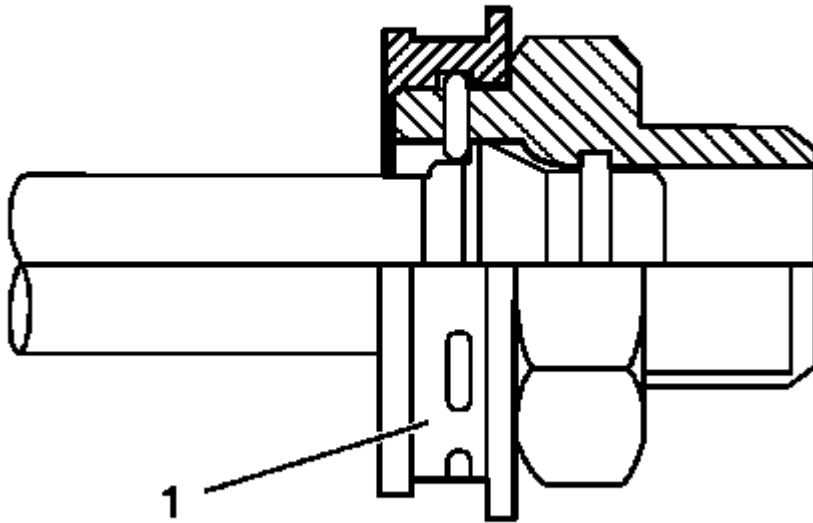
Automatic Transmission Oil Cooler Fitting Plastic Cap
